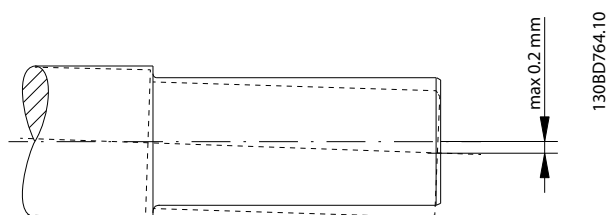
Maximum Allowed Eccentricity of the Conveyor Shaft
